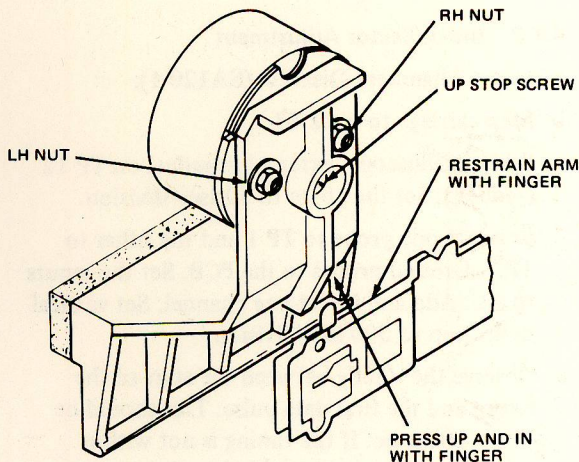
HEAD LOAD ACTUATOR ADJUSTMENT
